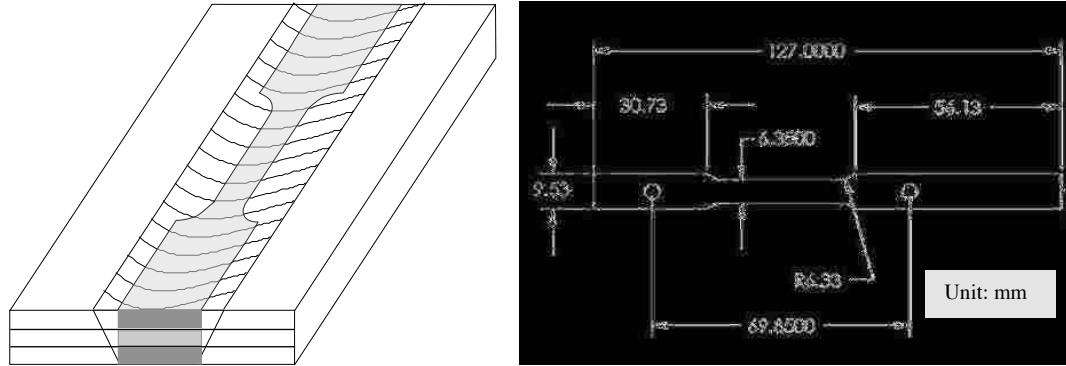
Location and dimensions of longitudinal tensile test samples
